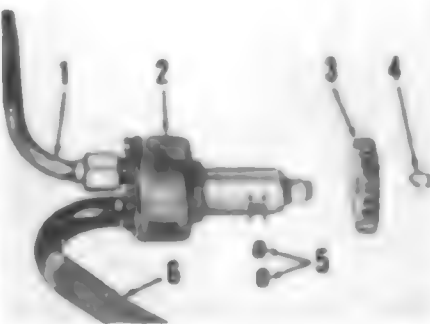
Lube pump removed from Model 684, 784 or 884. Internal parts are not serviceable.
